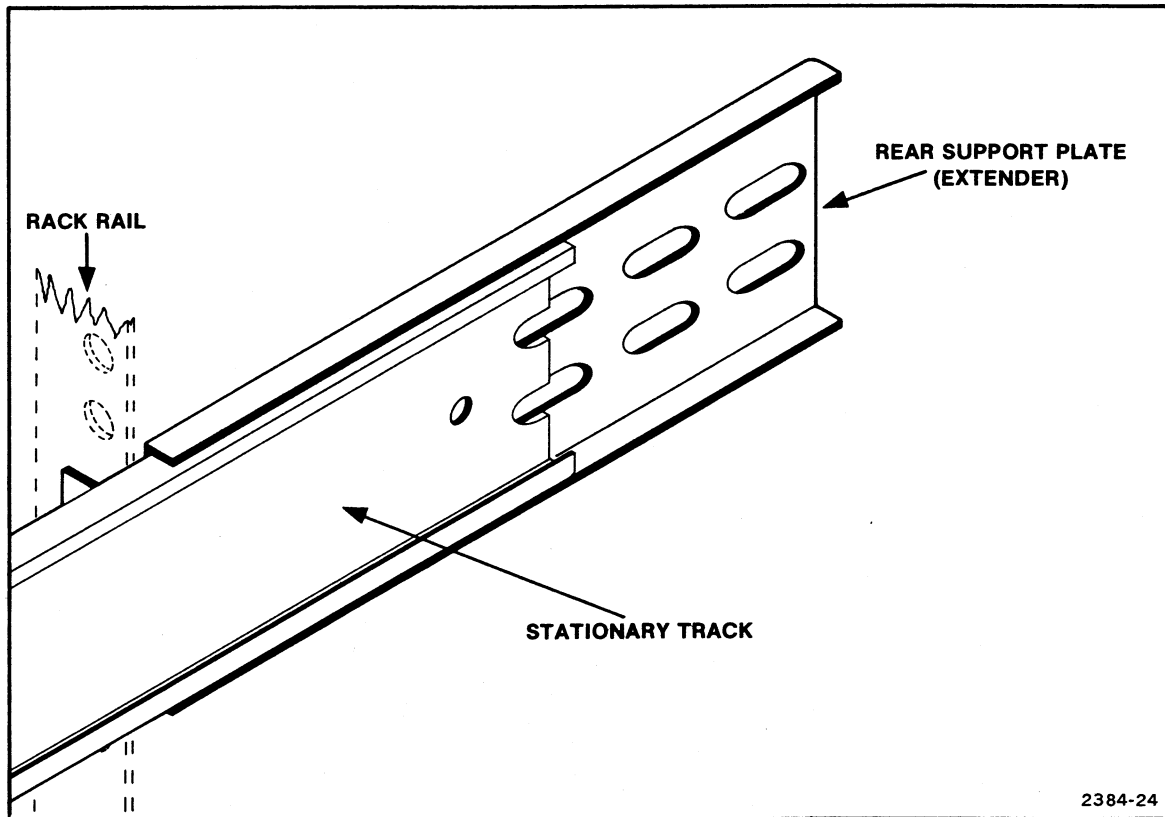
Reversing the rear support plates for a shallow rack.
